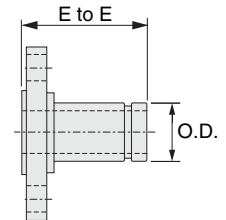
SS STAINLESS STEEL FLANGE ADAPTER
